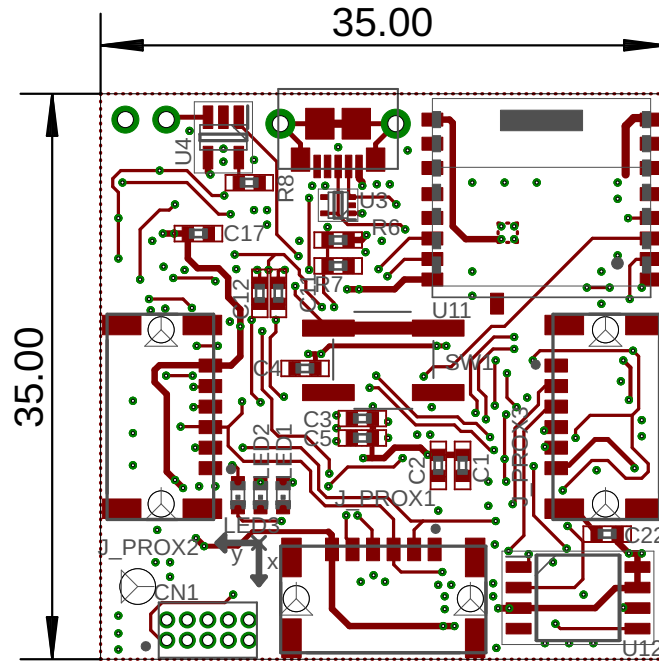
Top view of the SWING layout (units in millimeters).
